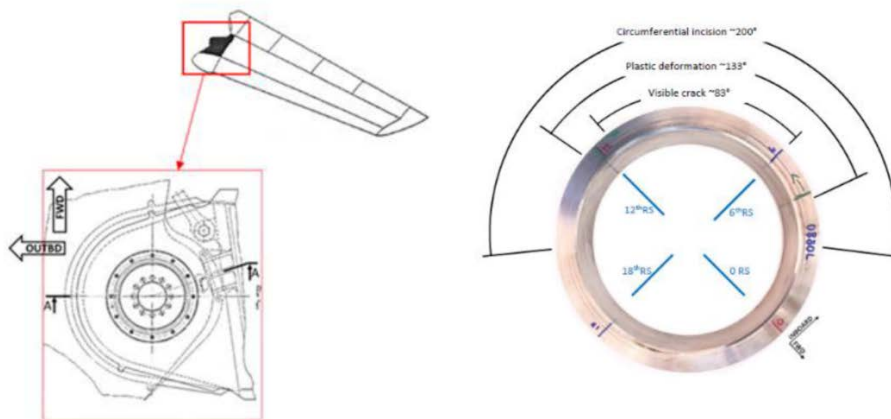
Tornado lower pivot bushings of the diffusion joint
